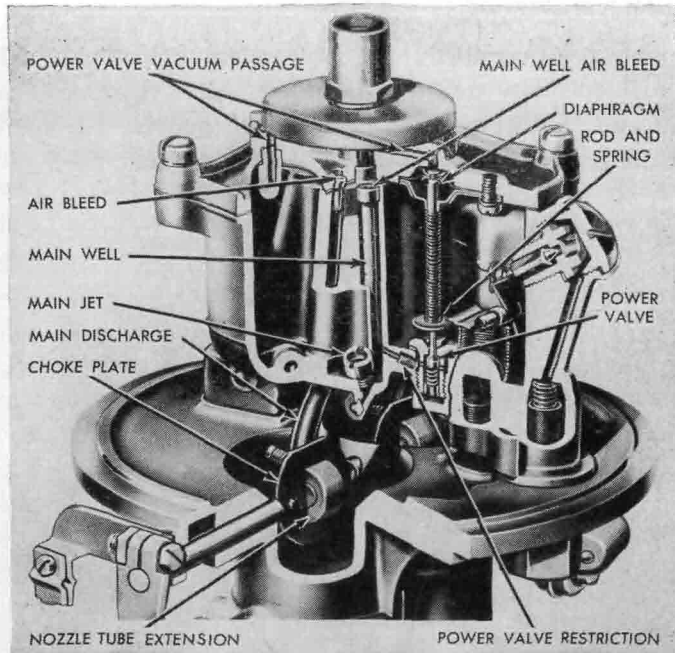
Main power circuit of carburetor. (Ford Motor Company)
